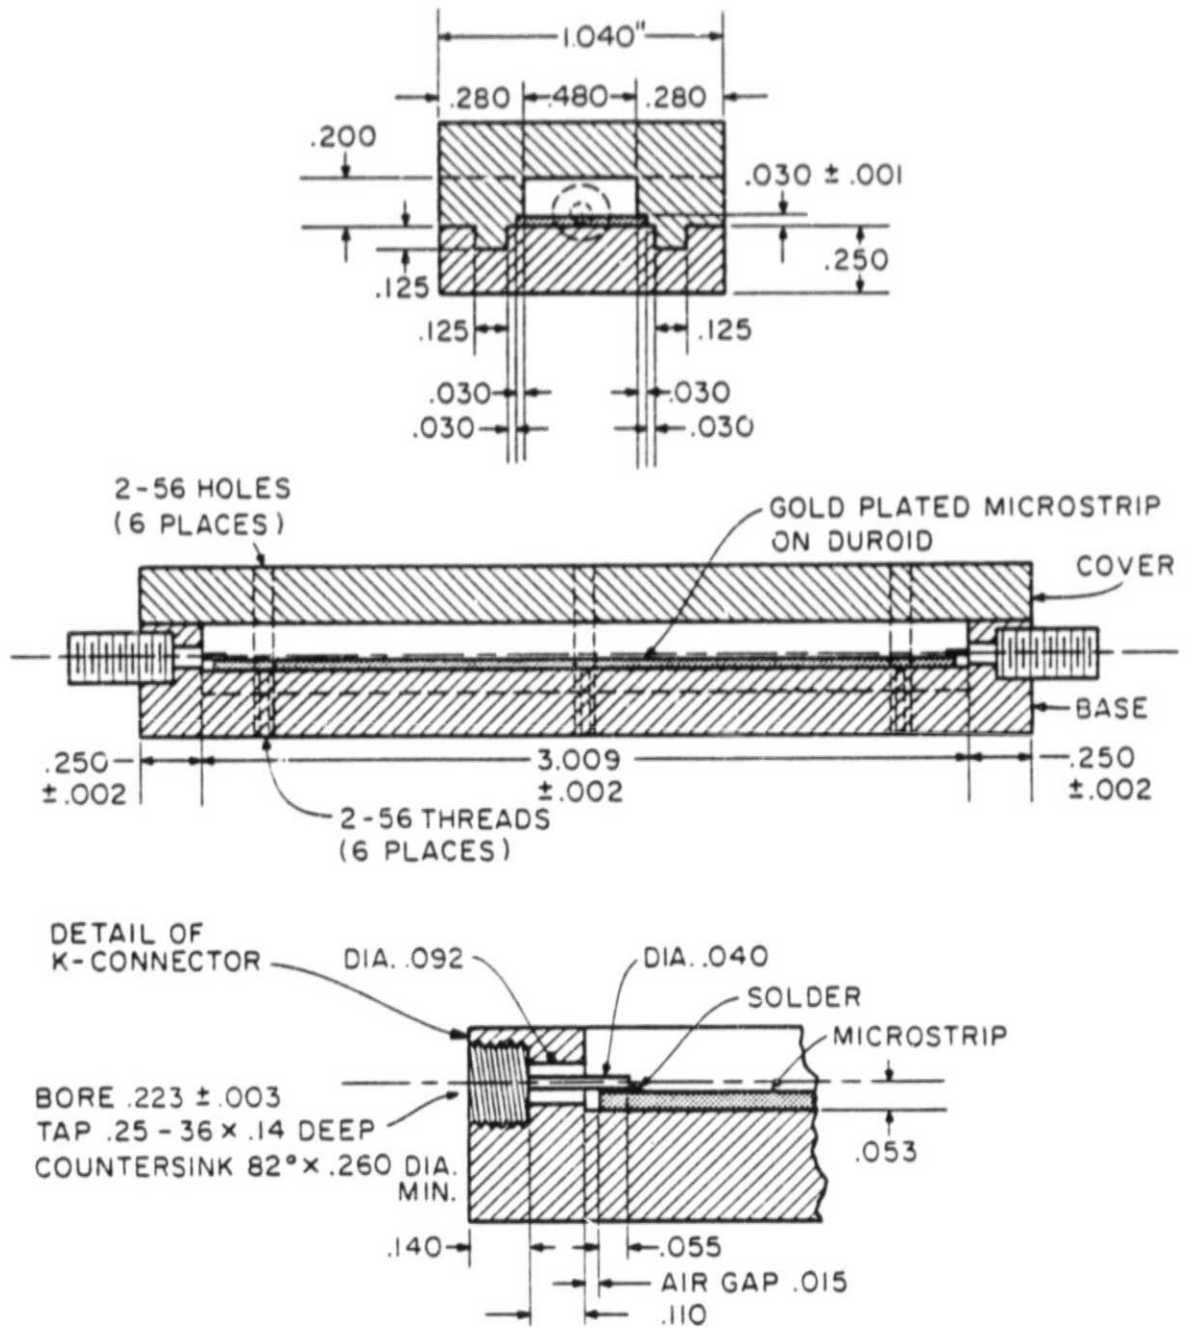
Machine drawing of test fixture. Note 0.015" compensation gap; this provides matching between connector and microstrip. All dimensions are in inches.
